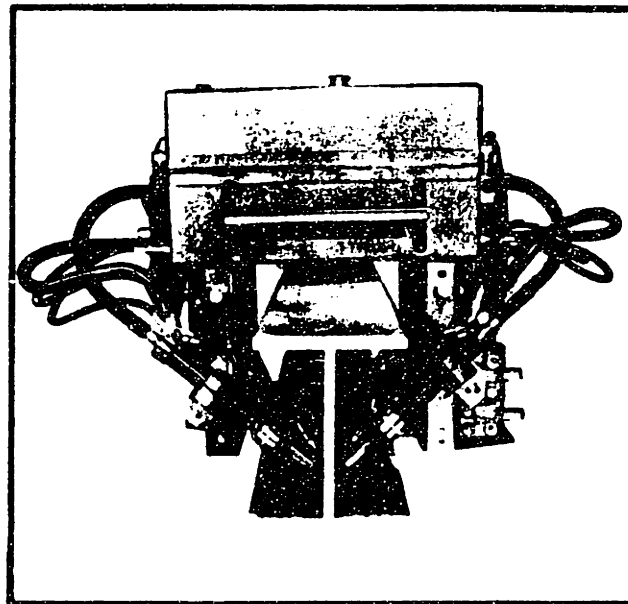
Doodle Bug mobile welding machine. (40)
